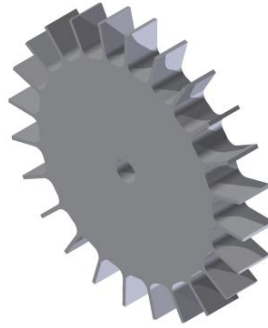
A CAD model for a 24 blade paddlewheel blisk
